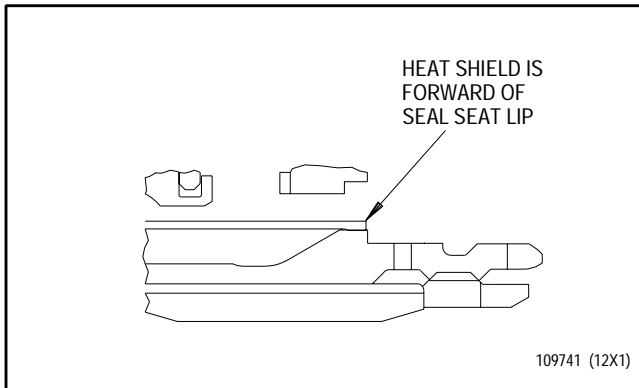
No. 5 Bearing Seal Seat and No. 5 Bearing Seal Seat Nut - Installation (Sheet 3 of 3)
